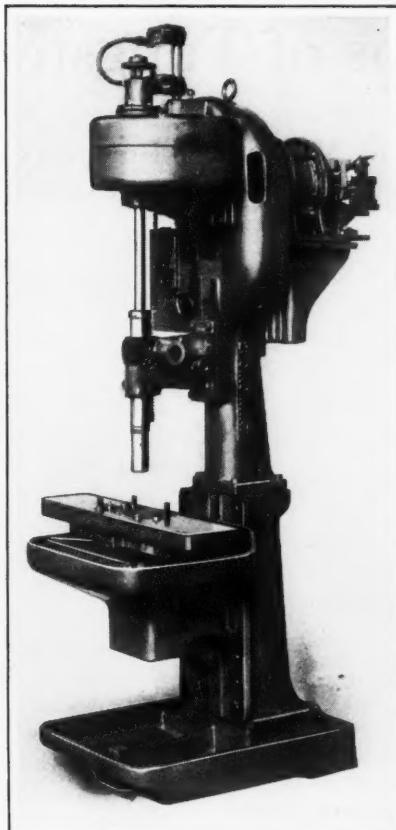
Machine with Lead-screw on Spindle for the Positive-lead Tapping of Spark-plug Holes
